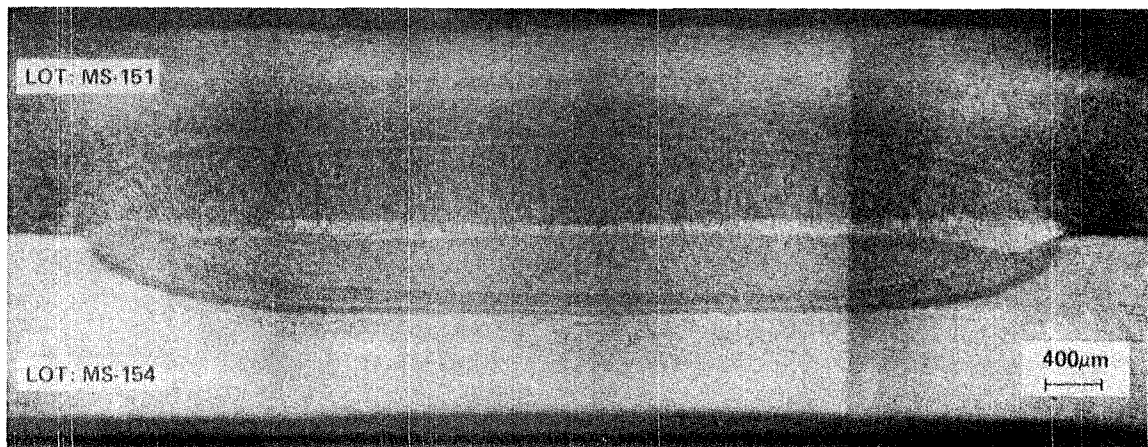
Electron Beam Weld in HDA 8077
